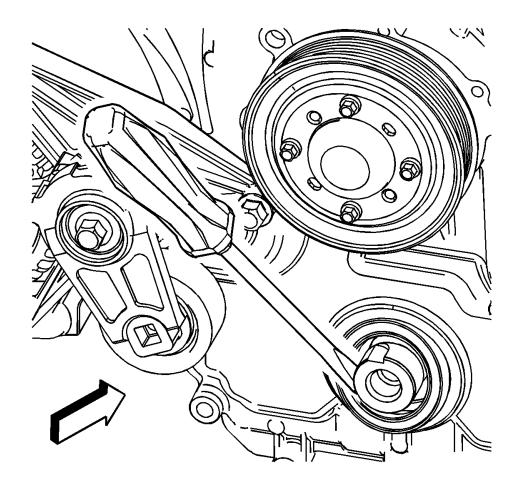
Removing Crankshaft Front Oil Seal Courtesy of GENERAL MOTORS COMPANY
